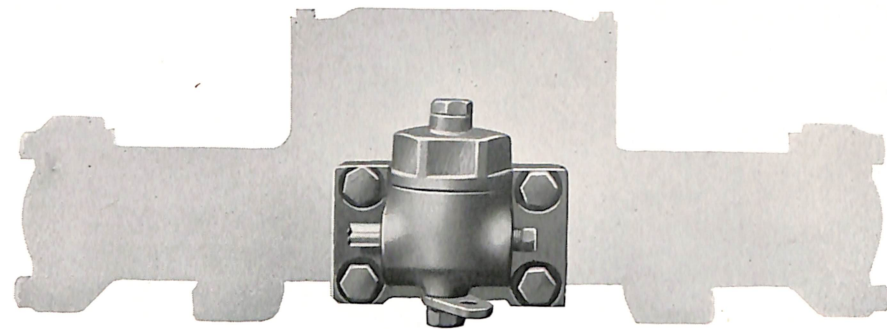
Type "E" Folding Door Engine, showing location of Rotary Valve.
